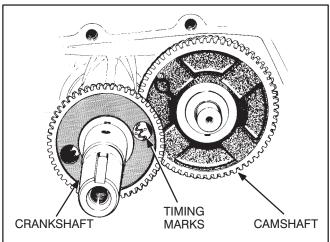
CRANKSHAFT AND CAMSHAFT TIM-ING MARKS
